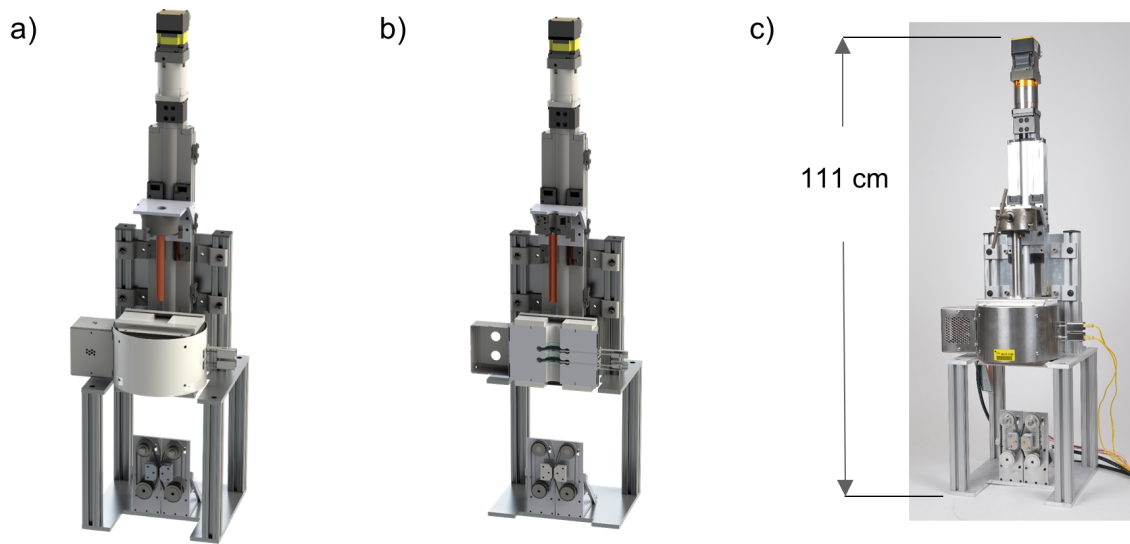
a) Rendered schematic of the BDT assembly. b) Section view of the BDT exposing the furnace interior. Two contiguous heating zones shape the temperature profile in the neck-down region. The preform axis aligns with the fiber pulling system below the furnace with a precision linear slide table and three-jaw centering lathe chuck. c) Actual photograph of fully assembled BDT system.
